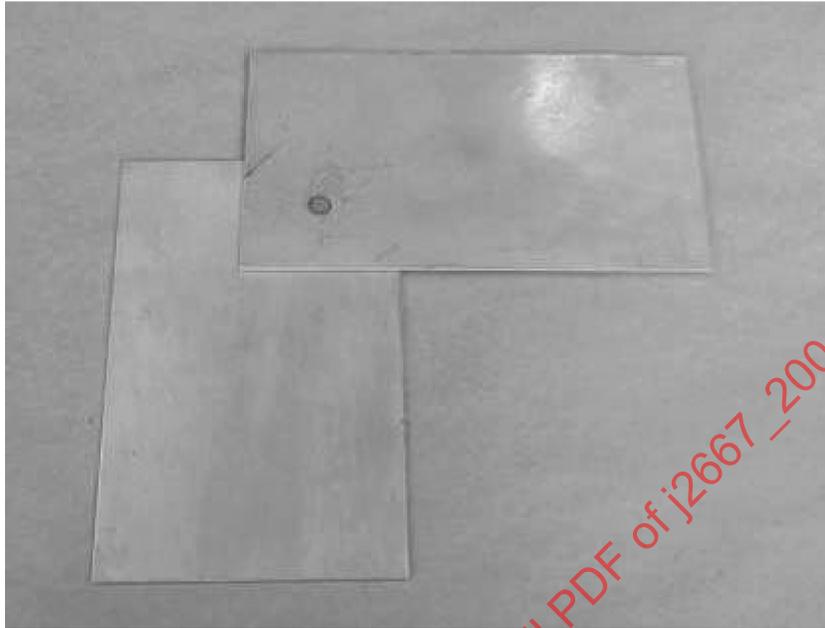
TEST COUPON ASSEMBLY AND WELD LOCATIONS FOR TWIST TEST
